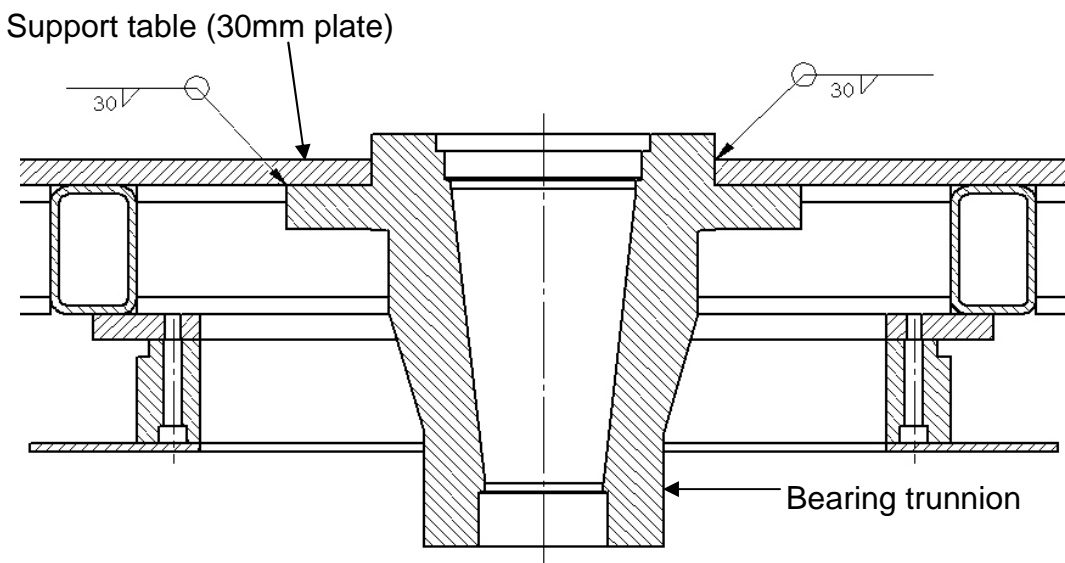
Section view of the support table showing bearing trunnion arrangement
